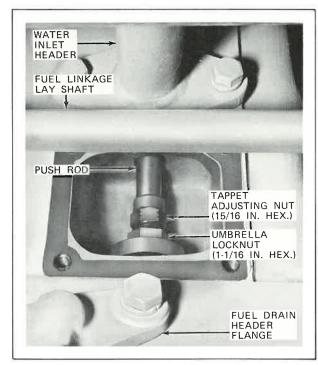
FUEL INJECTION PUMP TAPPET ROD ARRANGEMENT.
